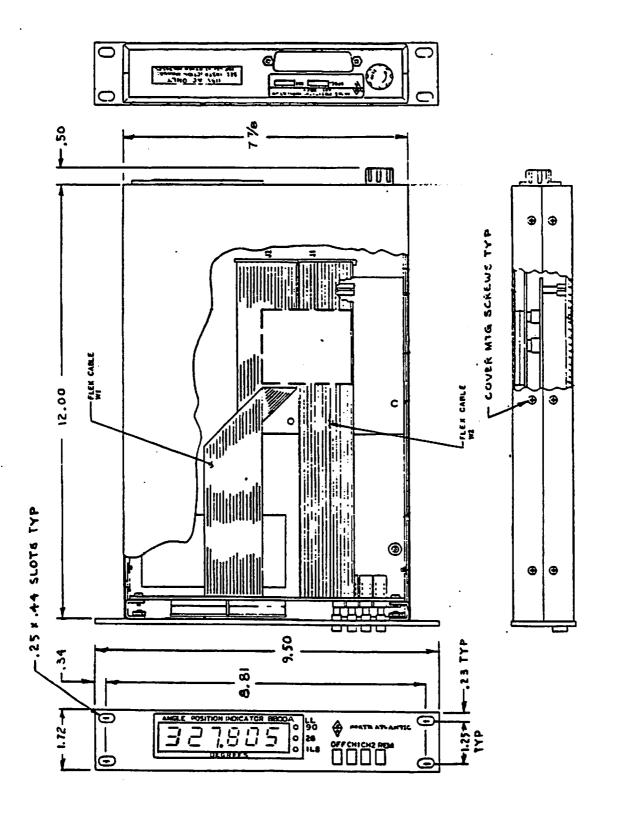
API Outline Drawing (with 180° Digital Board)
